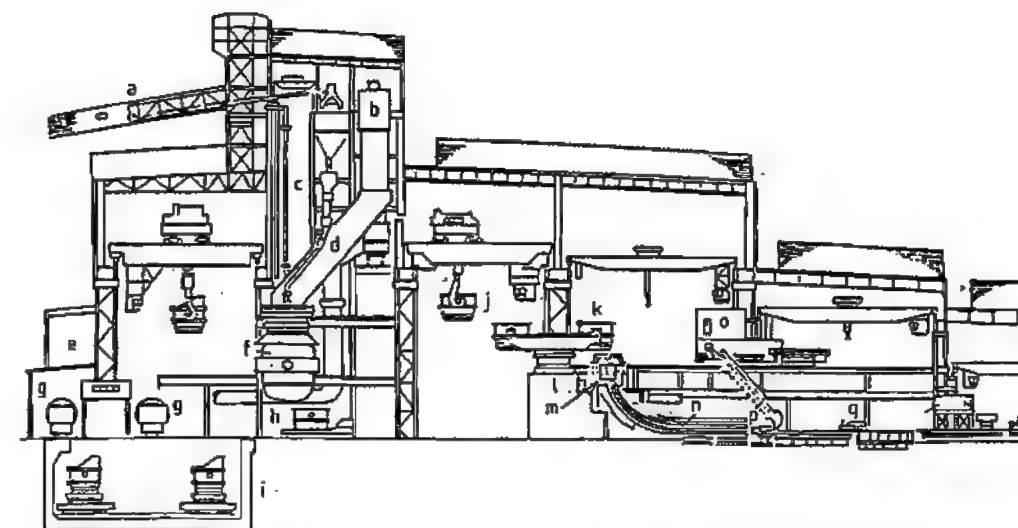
Converter and continuous casting plant: a) Feeder conveyor belt; b) High bunker; c) Blowing lance; d) Chute; e) Control room; f) 310 t converter; g) 600 t torpedo ladle car; h) Ladle transporter; i) Pig iron filling pit; j) Filled ladle; k) Pouring ladle; l) Ladle turret; m, n) Continuous casting machine; o) Continuous casting control room; p) Dummy bar; q) Cutting.
